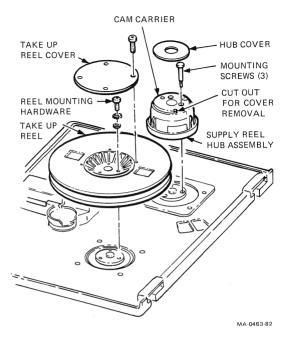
Take-Up Reel and Supply Reel Hub Assemblies
